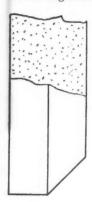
Drawing of a wheel dressed to grind a cylindrical part with a taper.
